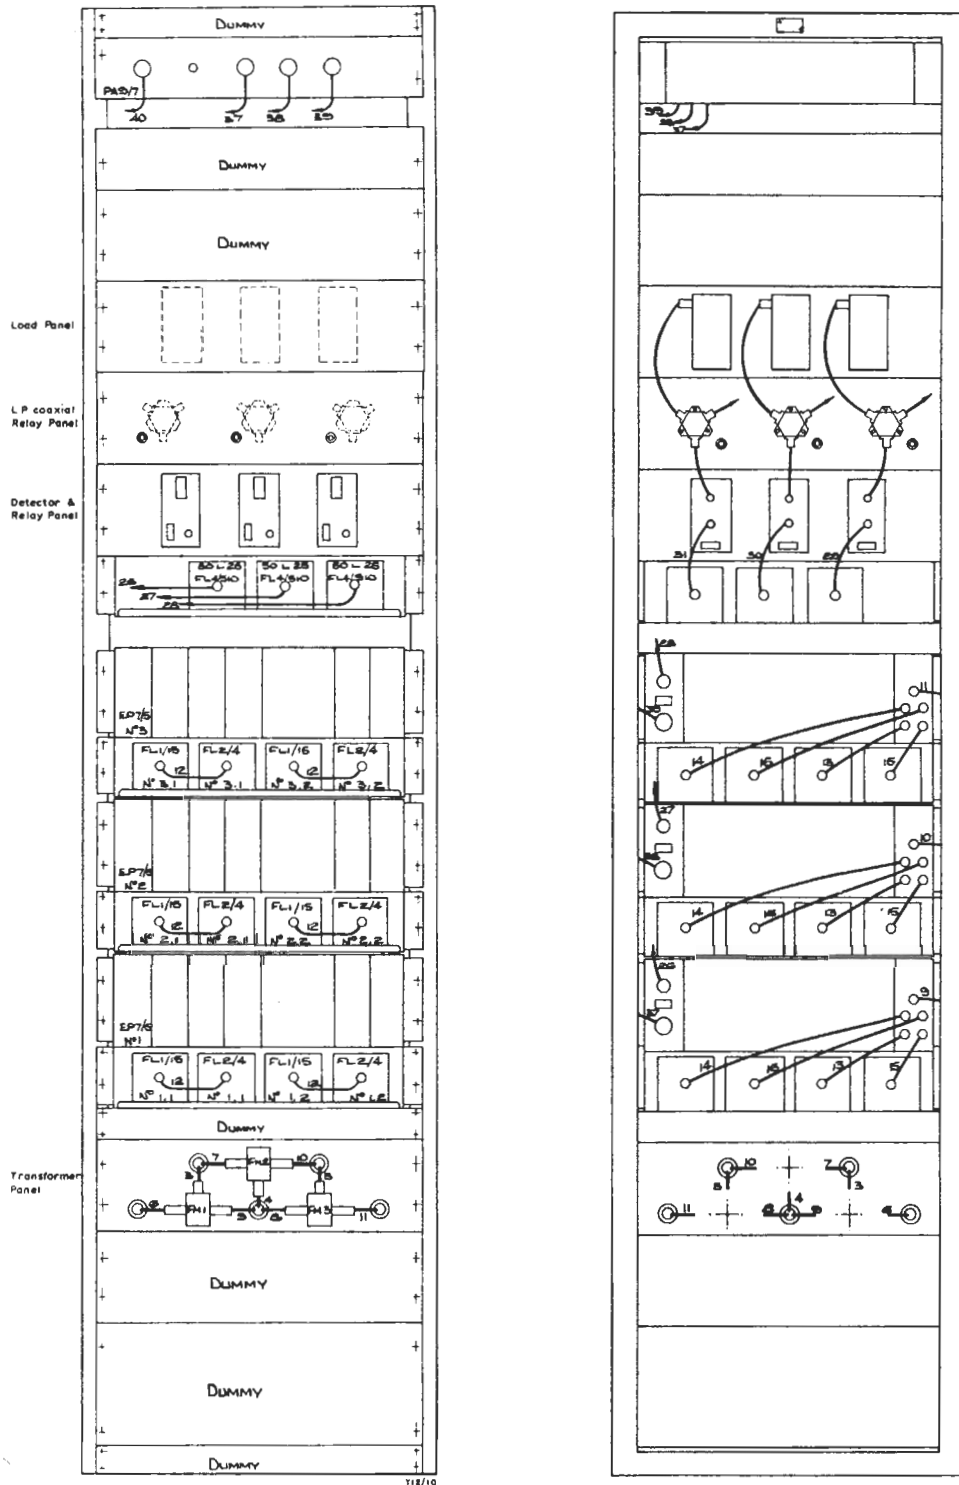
BA13/12 Assembly: Front (left) and Rear Views
